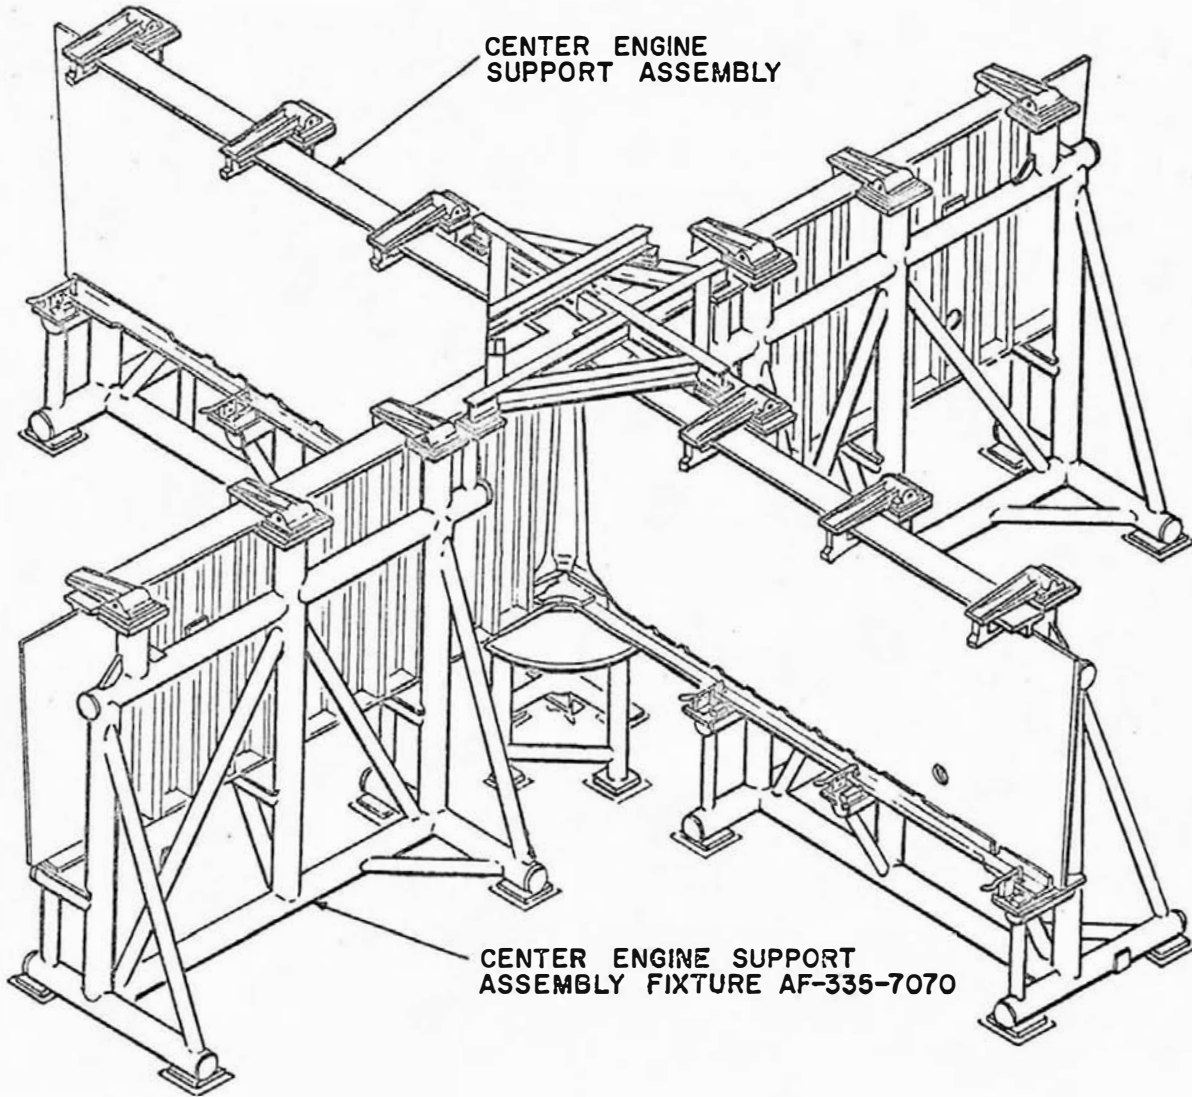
Center Engine Support Assembly, Assembly Fixture AF-335-7070
